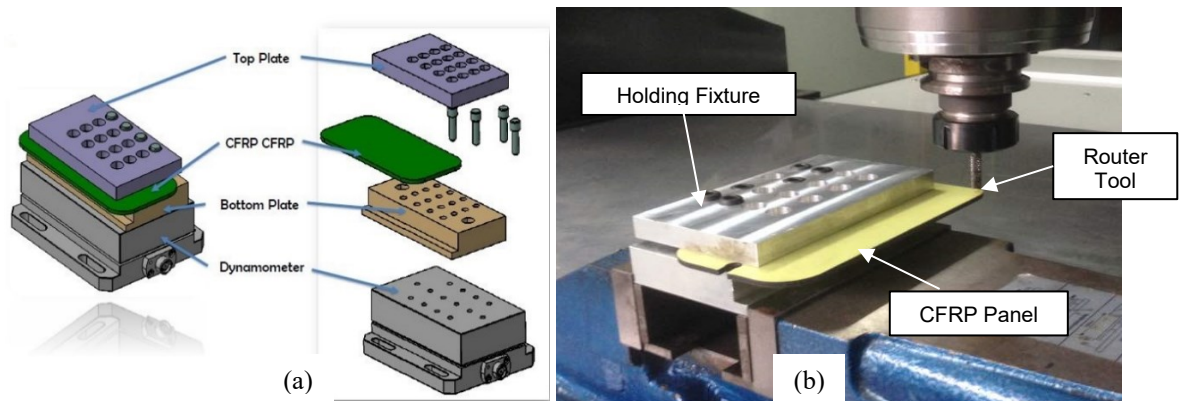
(a) CAD view of the jig with CFRP plate, (b) final fixture assembly preparation
